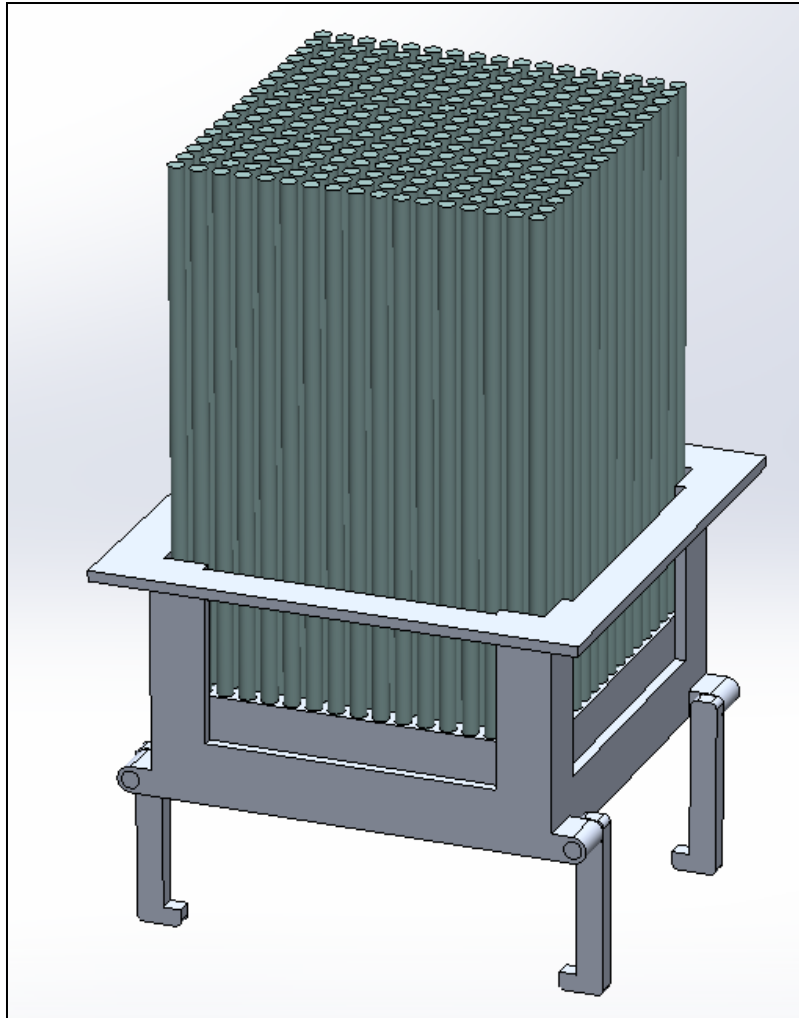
Lifting device used for picking up the fuel assembly, with 289 driving rods for removing the fuel rods
